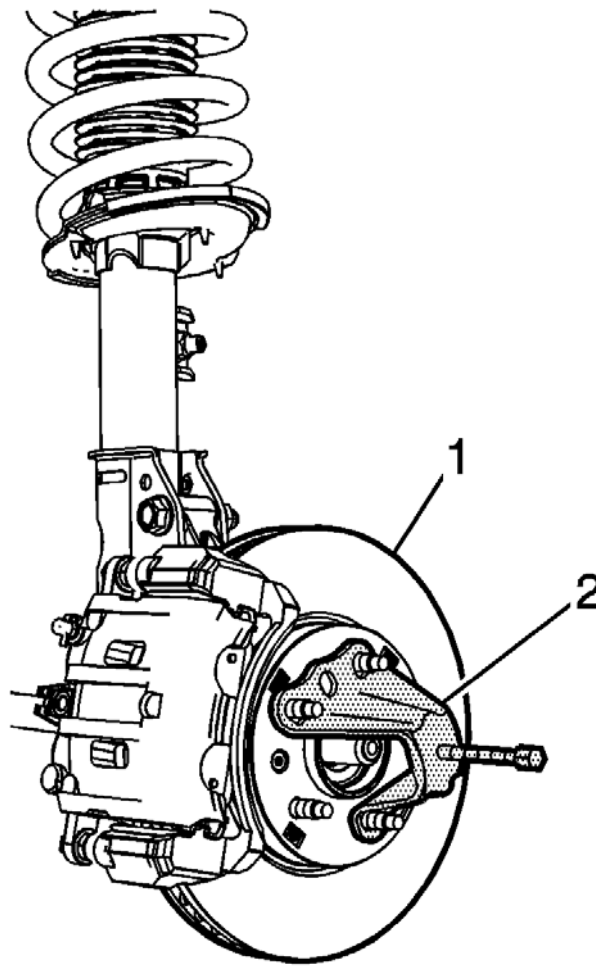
Separating Wheel Drive Shaft From Wheel Hub/Bearing
